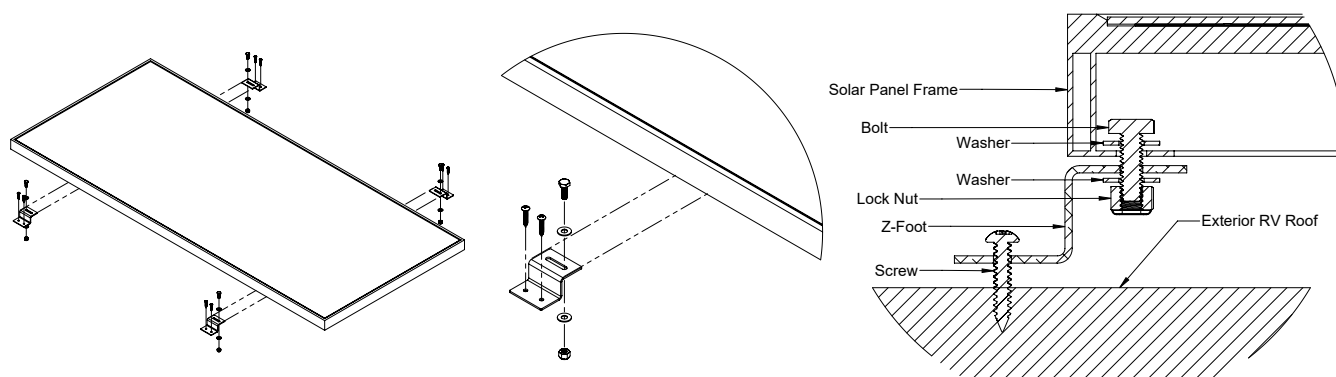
A: SOLAR PANEL INSTALLATION DETAILS
